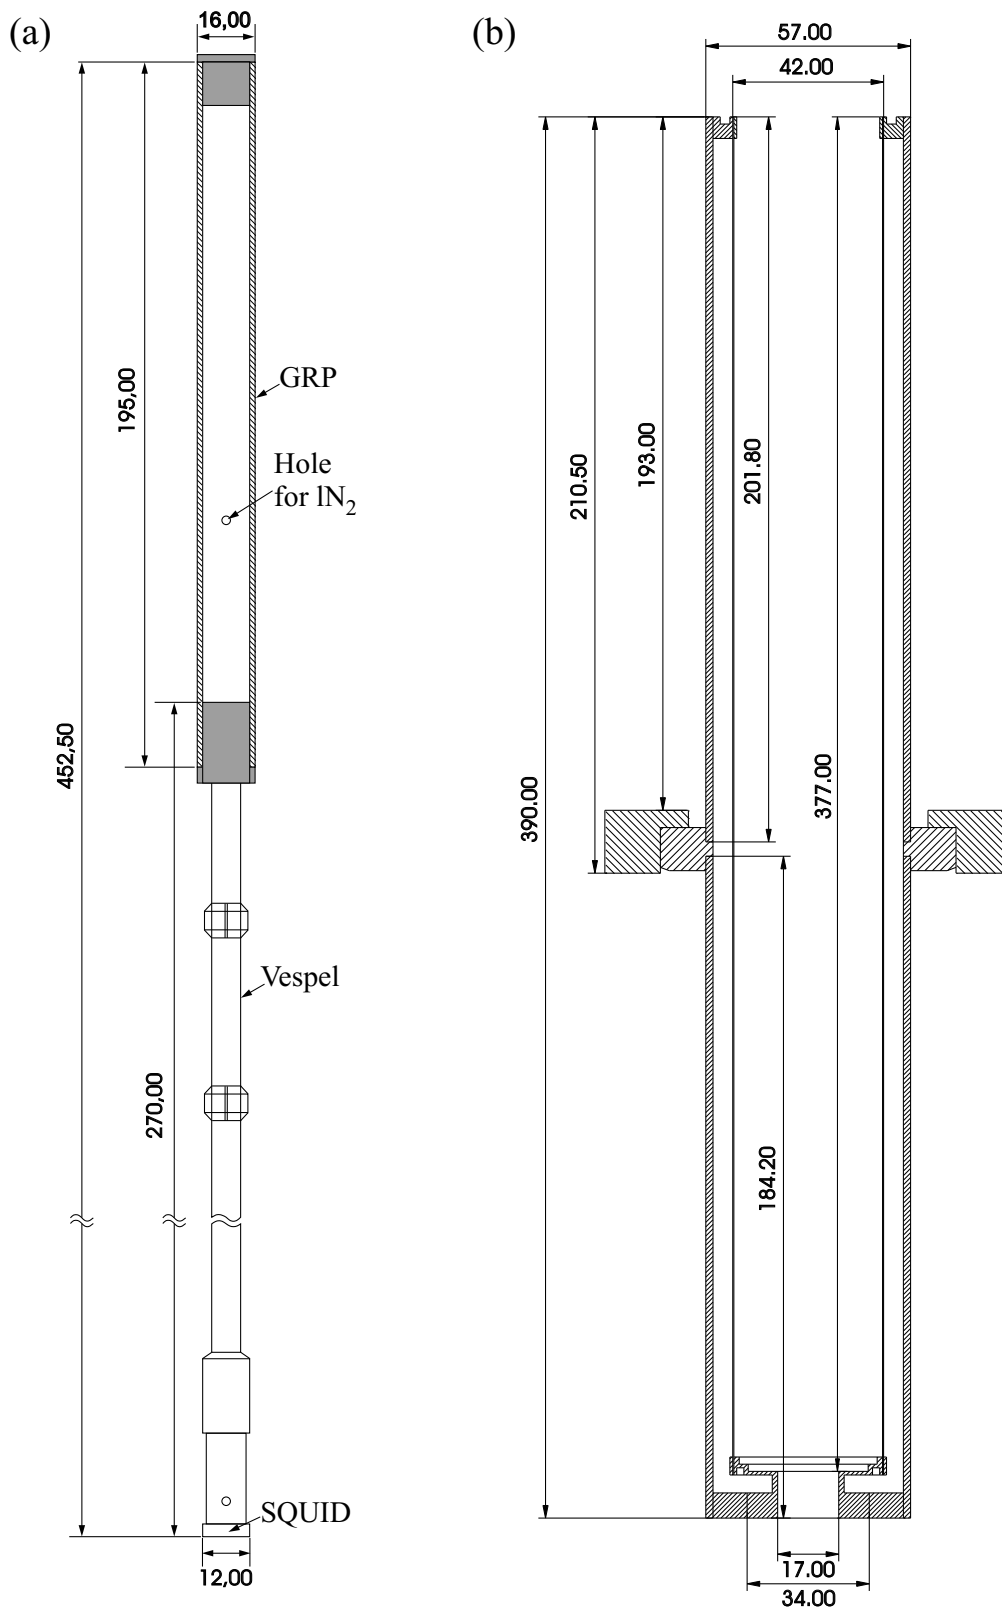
(a) Dimensions in mm of the SQUID holder made of a *Vespel* rod, which is connected to a tube of glass fiber reinforced plastic (GRP). (b) Dimensions in mm of the cryostat mounted on a DN 63 CF flange.
